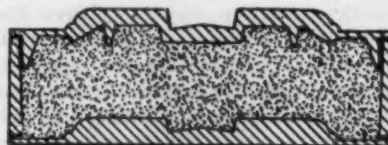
Plate Withdrawn and Surfaces in Contact.
